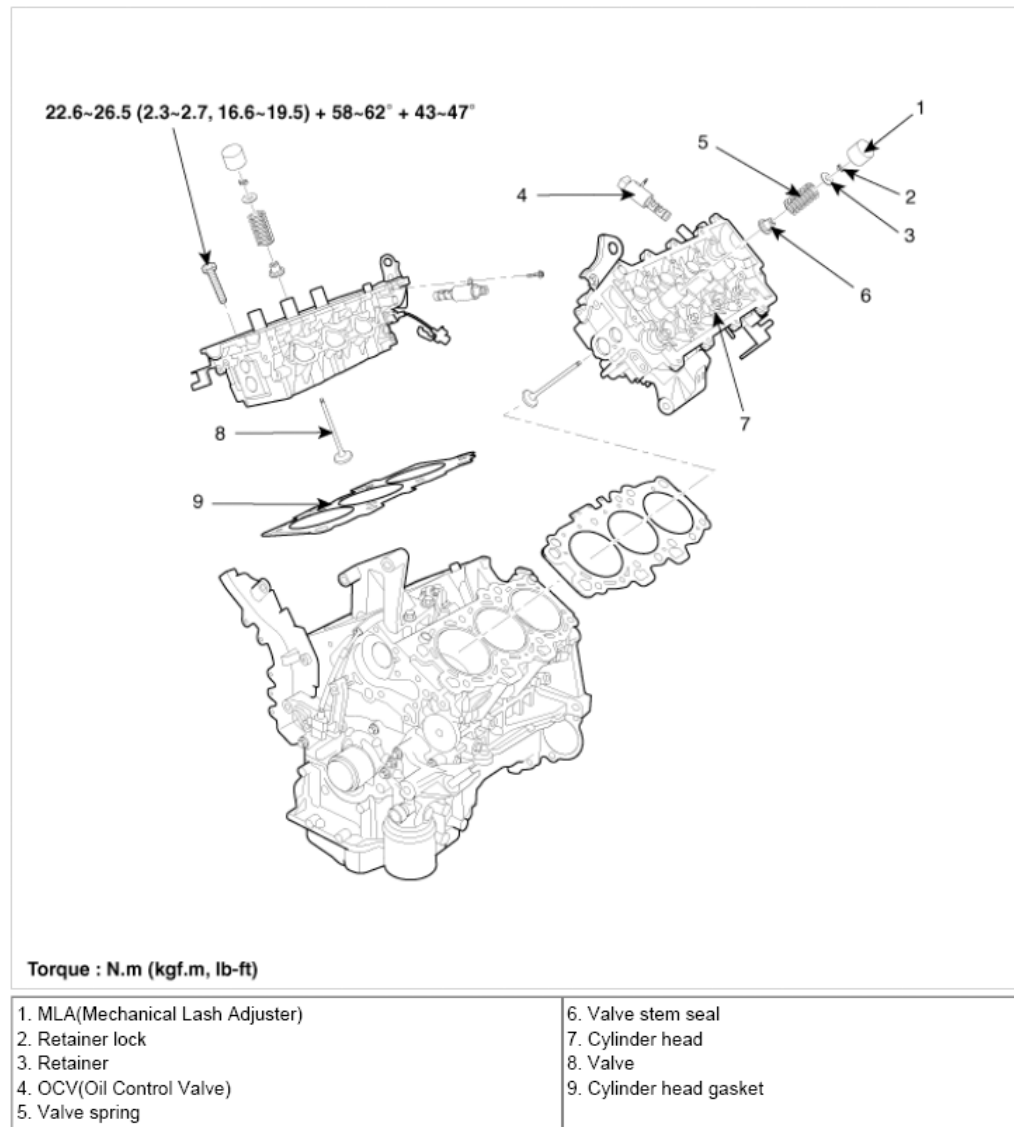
Exploded View Of Cylinder Head Assembly With Torque Specifications (2 Of 2)
